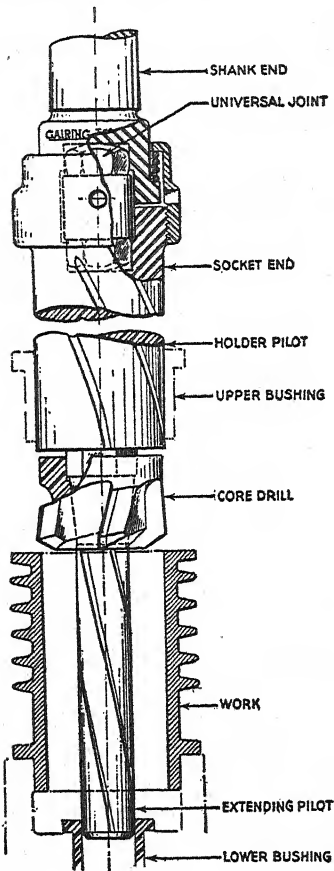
A Gairing Full-Floating Double-Universal Tool-holder and Renewable Core Drill for Core Drilling a Cast-Iron Cylinder.
